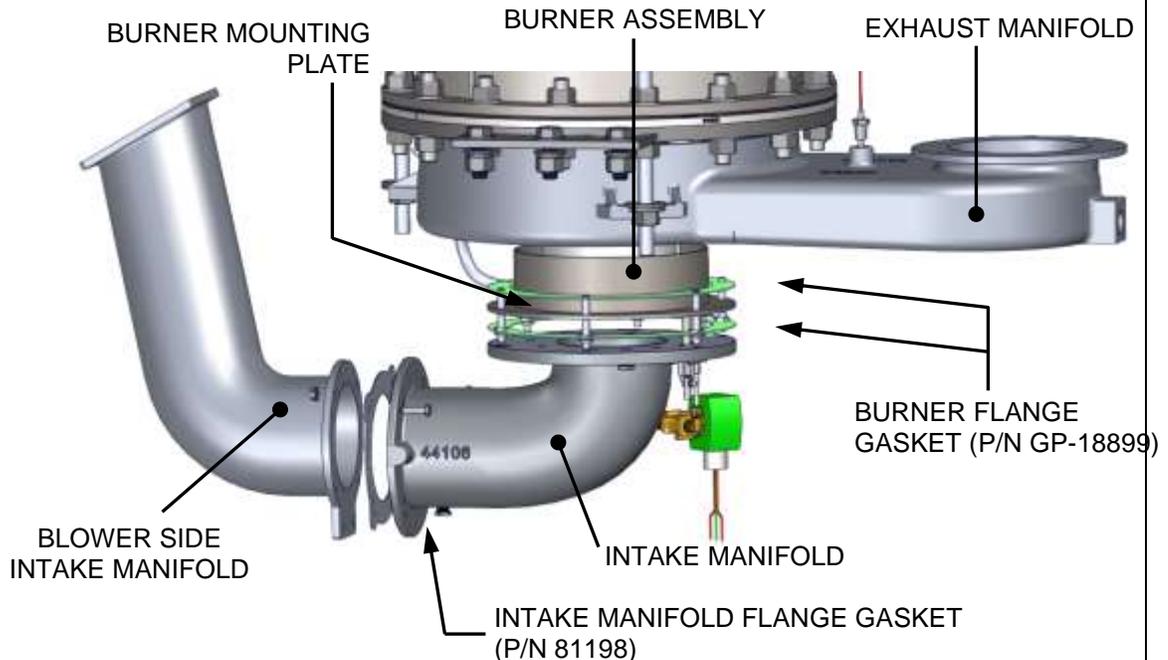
Intake Manifold and Burner – Cross-Section, Exploded
